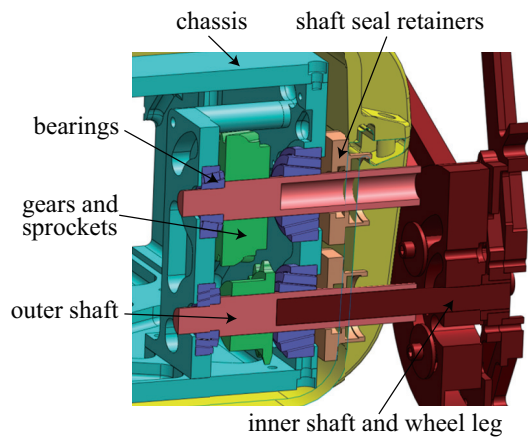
Cross section of the drive train highlighting the concentric shaft configuration. Components are laid out as such: blue – chassis; purple – bearings; green – gears and sprockets; orange – shaft seal retainers; pink – outer shaft; red – inner shaft and wheel-leg (colors are in original image).
